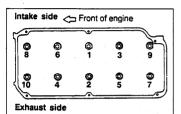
Cylinder head bolt tightening sequence—Mirage with 1.5L (4G15) engine
